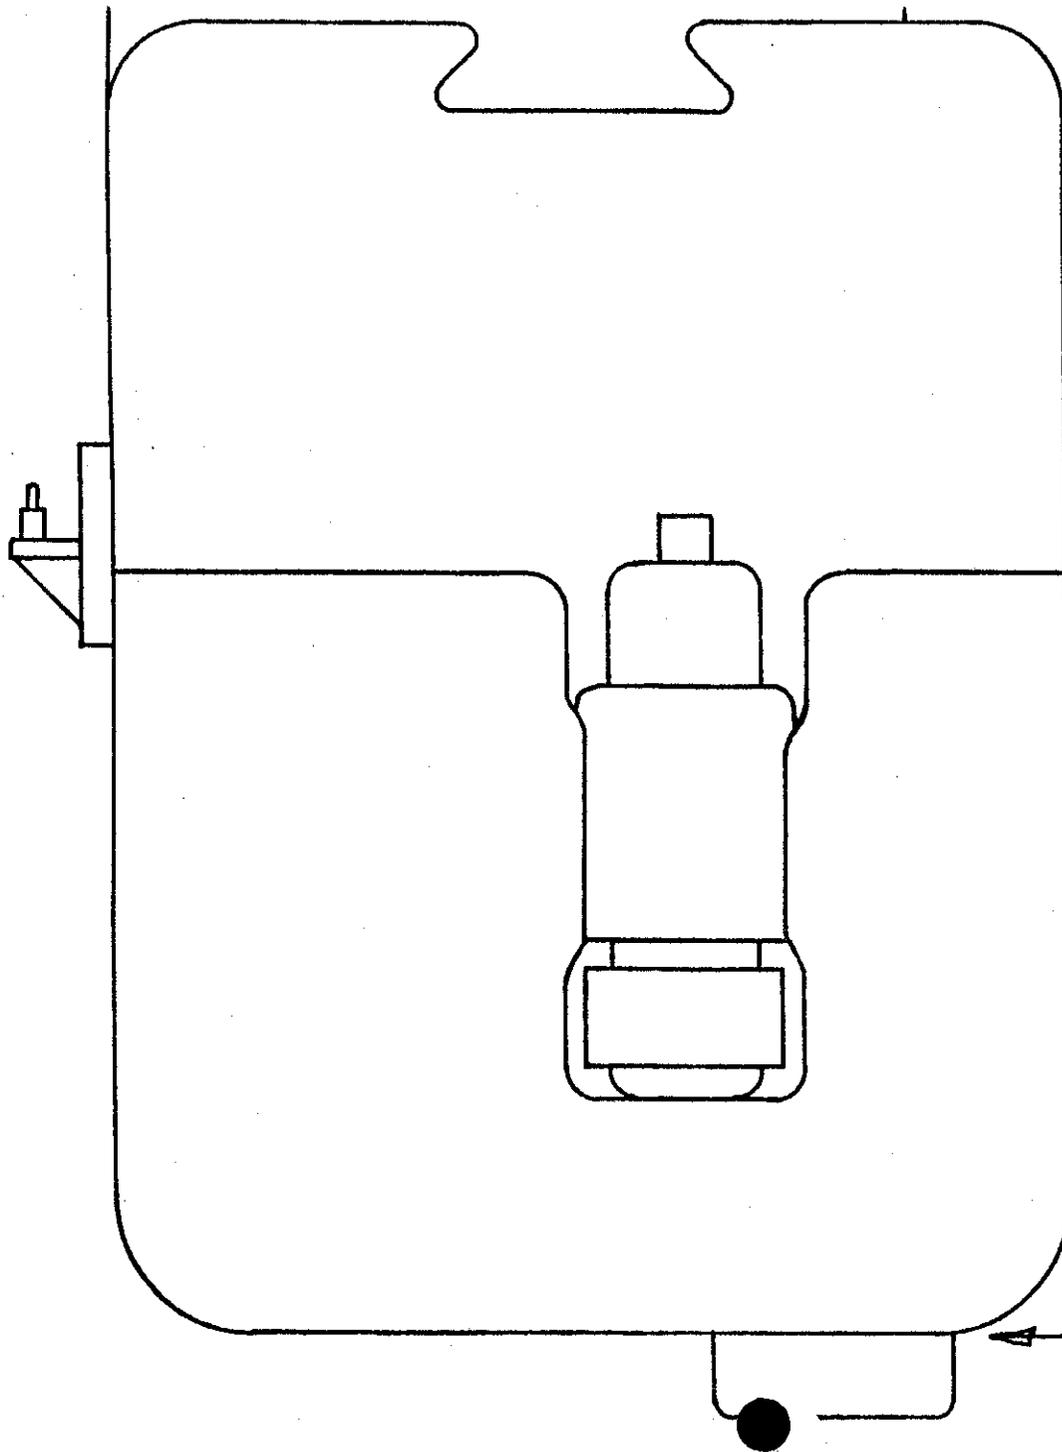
CUT WHEEL WELL BRACKET FOR WINDSHIELD WASHER BOTTLE CLEARANCE
